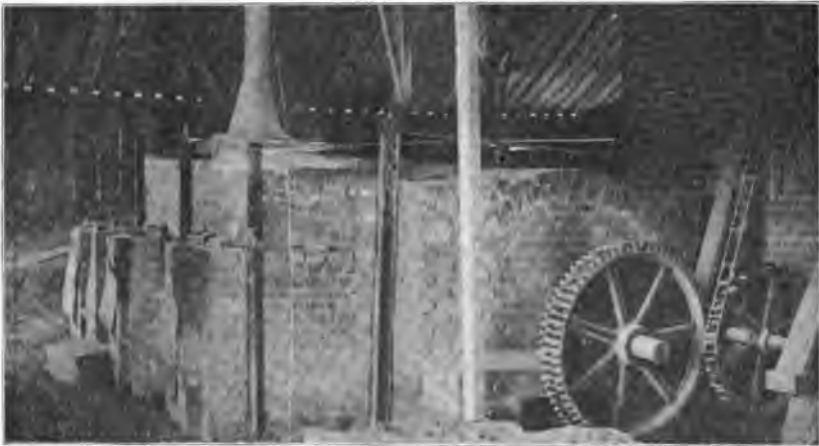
Home-made Rotary Dryer installed by the Detroit Roofing Tile Co.
